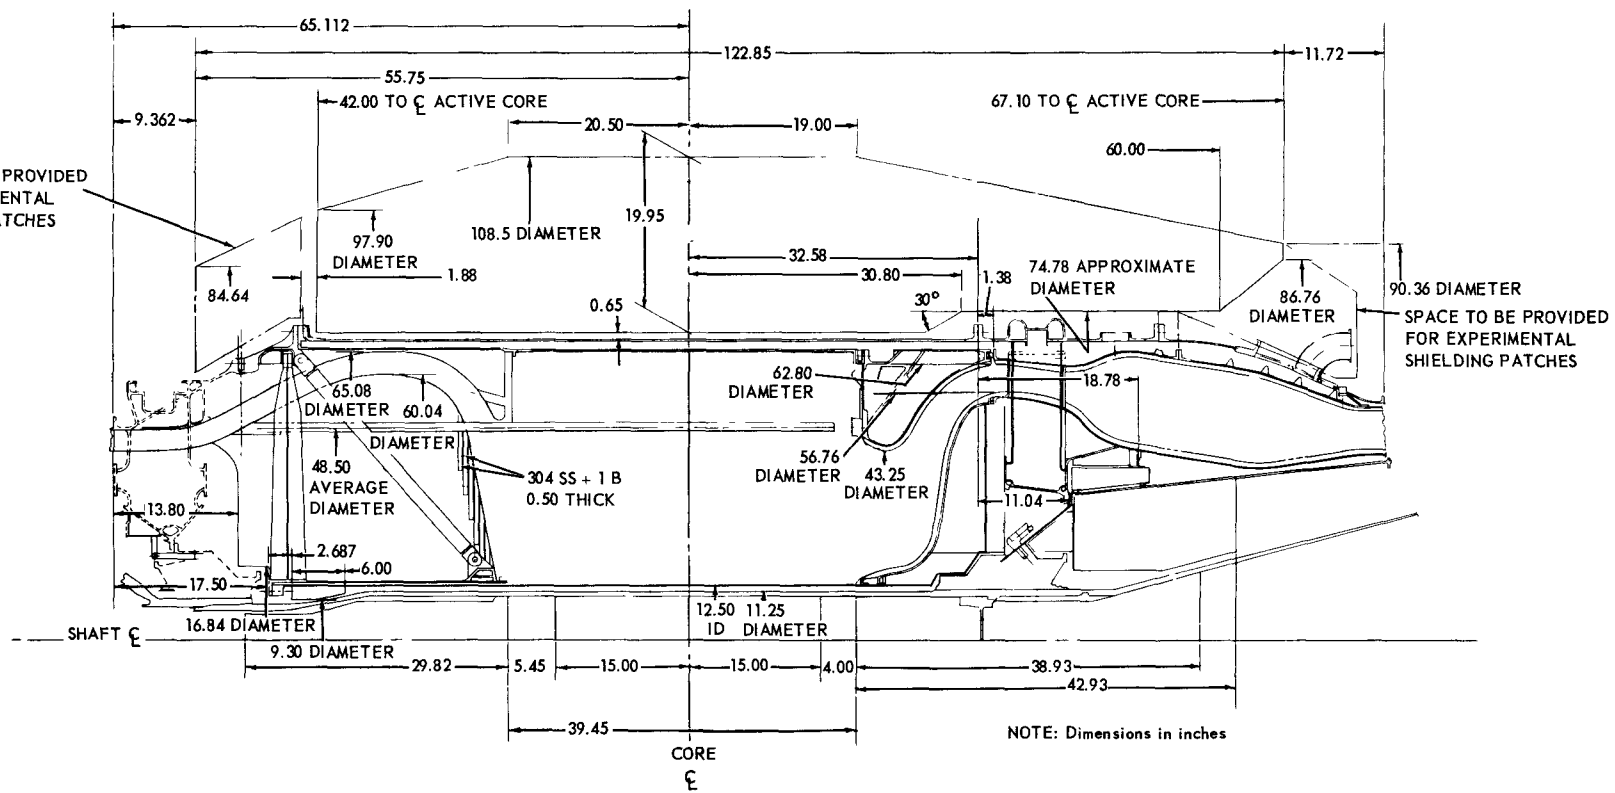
Control dimensions of XNJ140E-1 shield assembly
